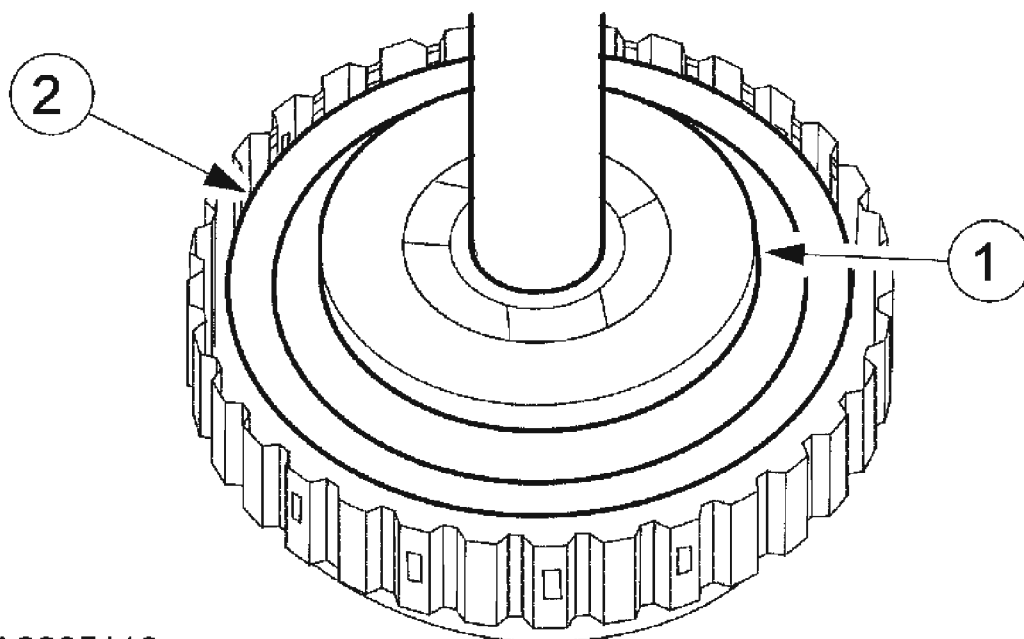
Installing Forward Clutch Assembly Suitable Press Using Special Tool
